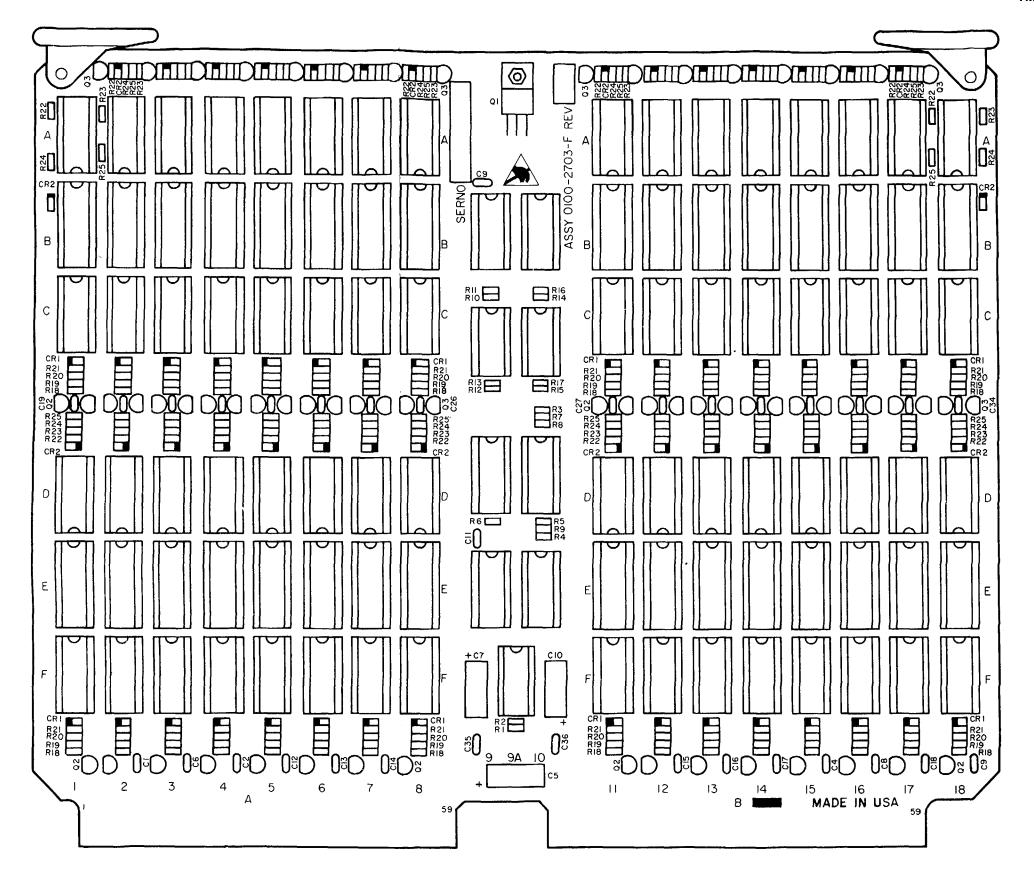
Driver/Sensor Board 0100-2703 Assembly Drawing
